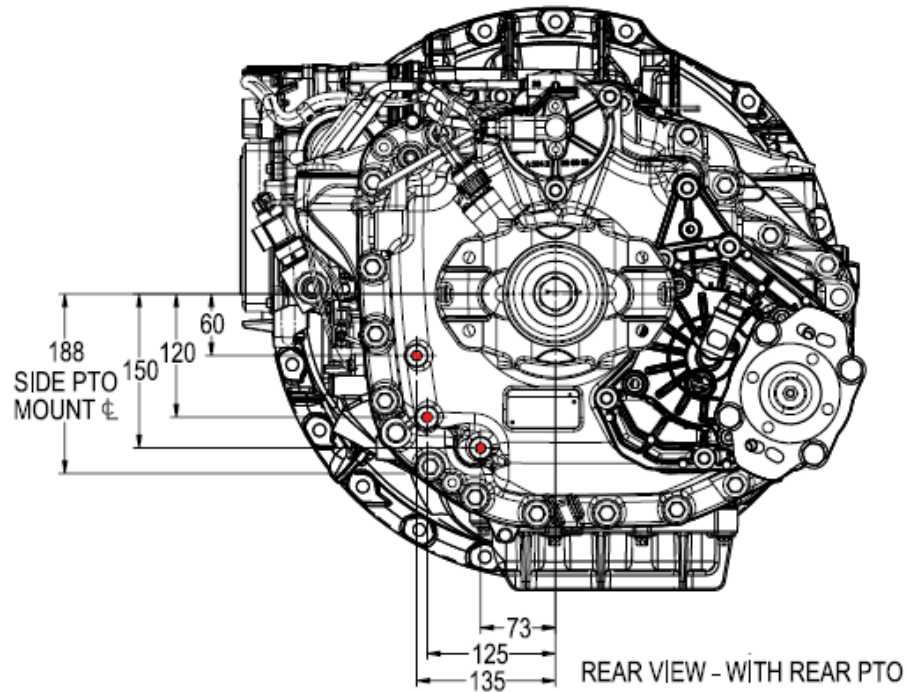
Rear-housing dimensions (in mm) for Bottom PTO Support Bracket
